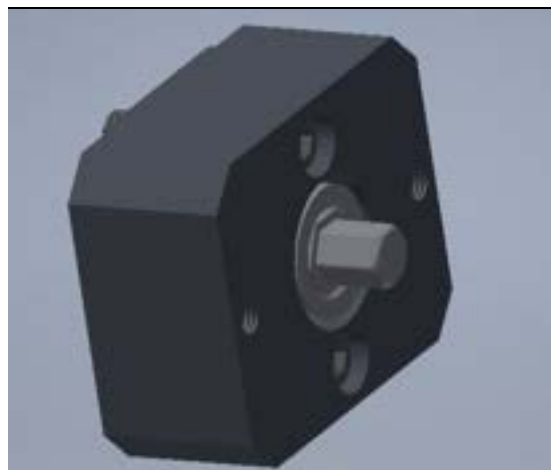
PNEUMATIC FEED BOX ADAPTER
